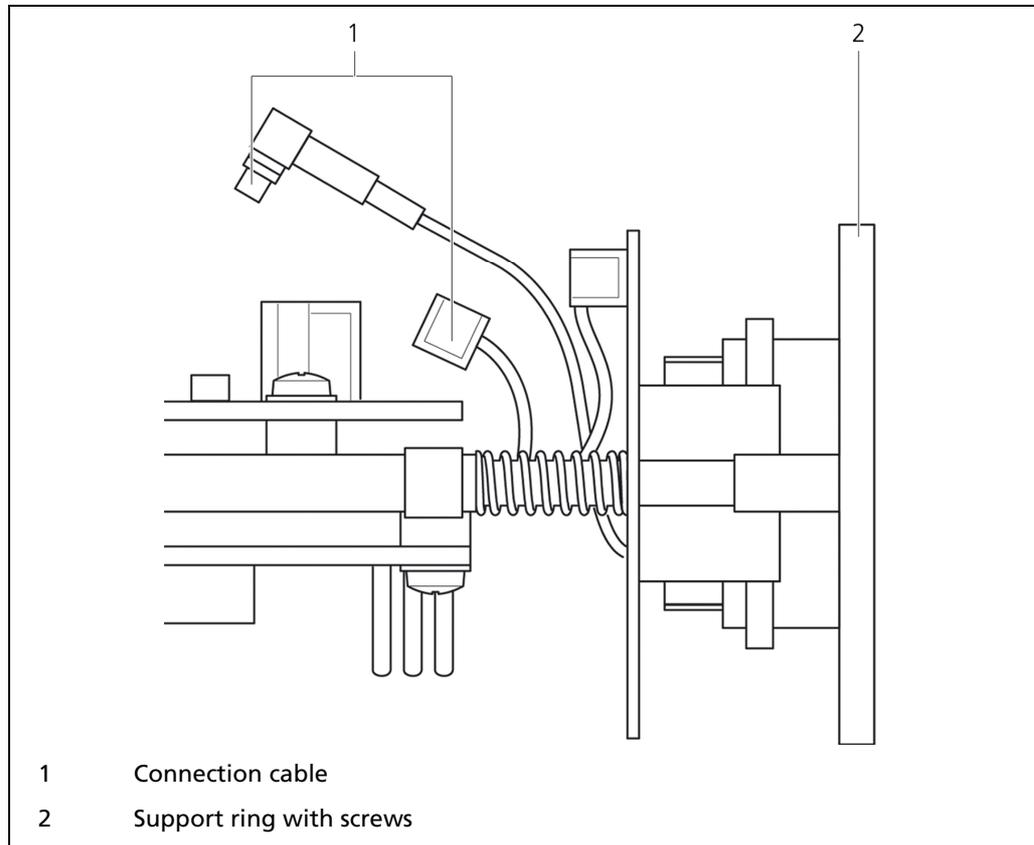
GAMMAcast detector LB 6739 Csl 40/50, PMT removed
